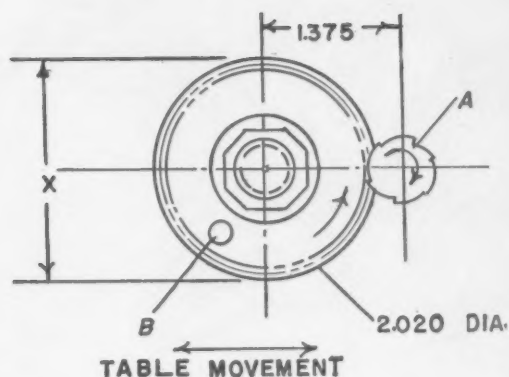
Blank setup and machine orientation procedure involves taking a preliminary cut (broken line) on the actual blank in order to establish the precise cutting size of the end mill. Diameter (X) should measure 2.0000 inches after the trial cut. If it does not, the zero radial reference dial should be corrected by one-half the difference between 2.0000 and the actual measurement of diameter (X). In the sketches, A is the expected 0.750-inch cutting diameter, B is the working pin, and P signifies surfaces that are ground and parallel.
